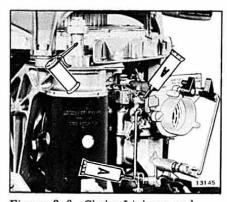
Choke Linkage and Starter Pinion Gear Shaft
